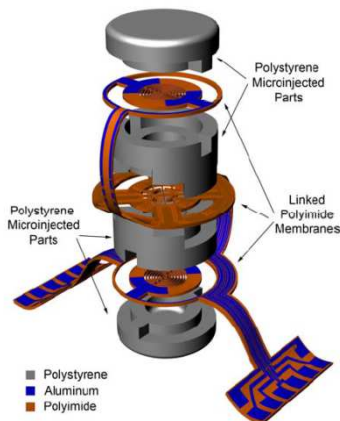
Three-axis thermal accelerometer drawing representation showing the main device parts and assembly configuration.
